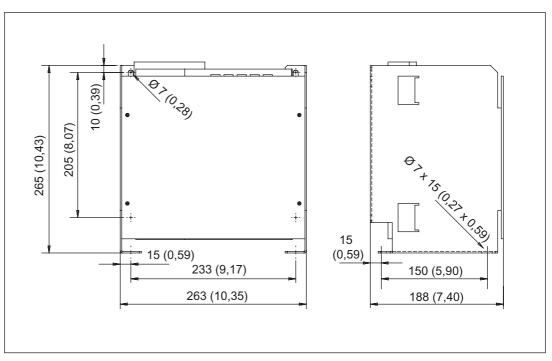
Dimension drawing of the voltage peak limiter, type 1
